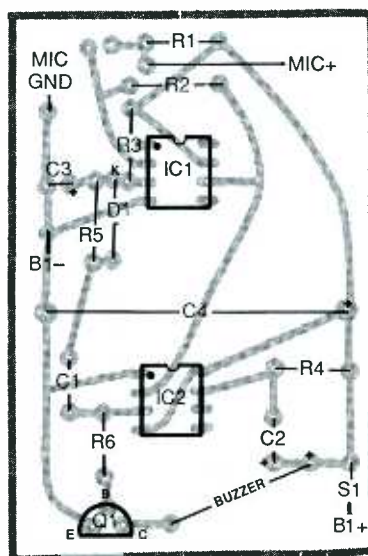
Wiring guide for pc board. Use this for component layout if you wire on perforated board.
